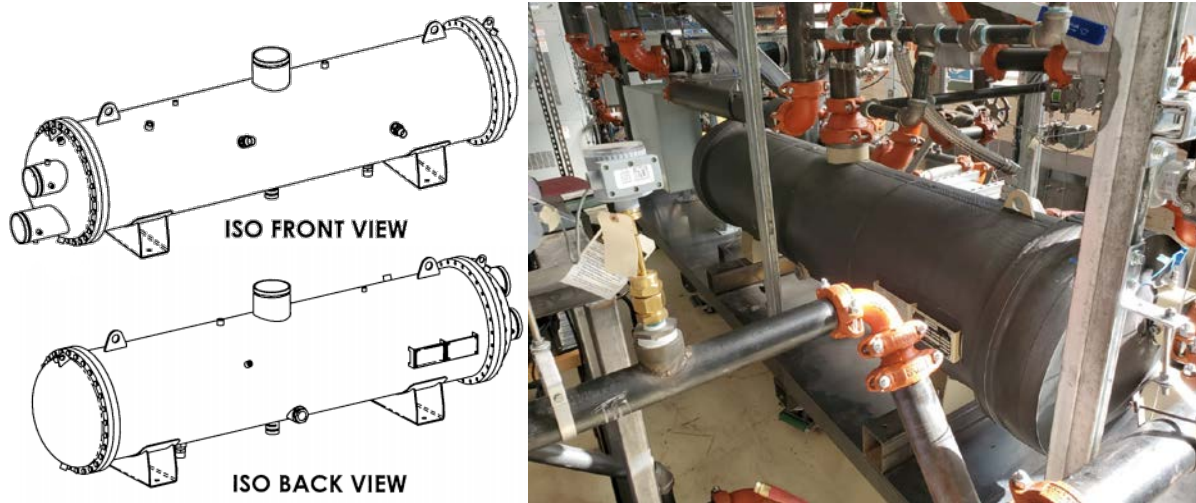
Evaporator engineering drawings (Left) and installed unit (Right)
